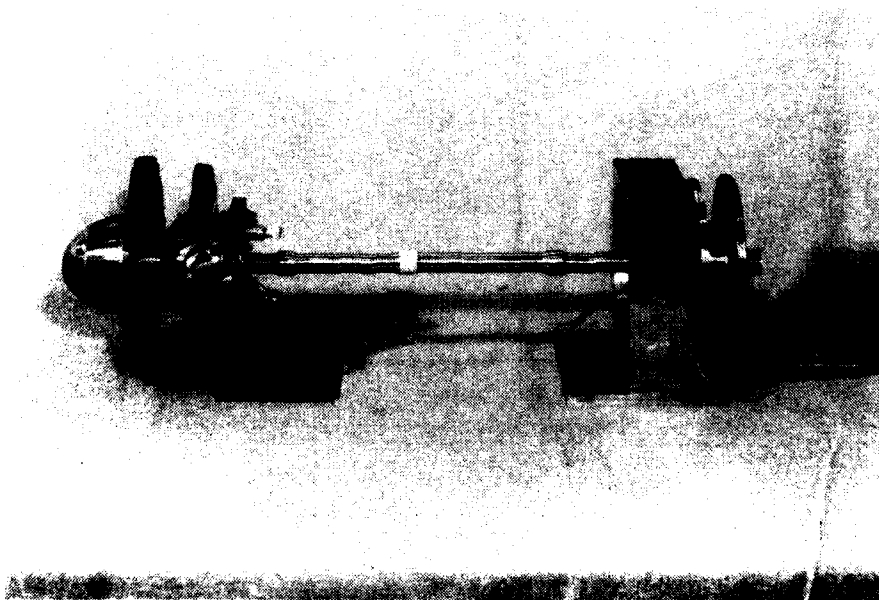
Solid LP Rotor Assembled in Bearing Pedestals - Fan End View.
